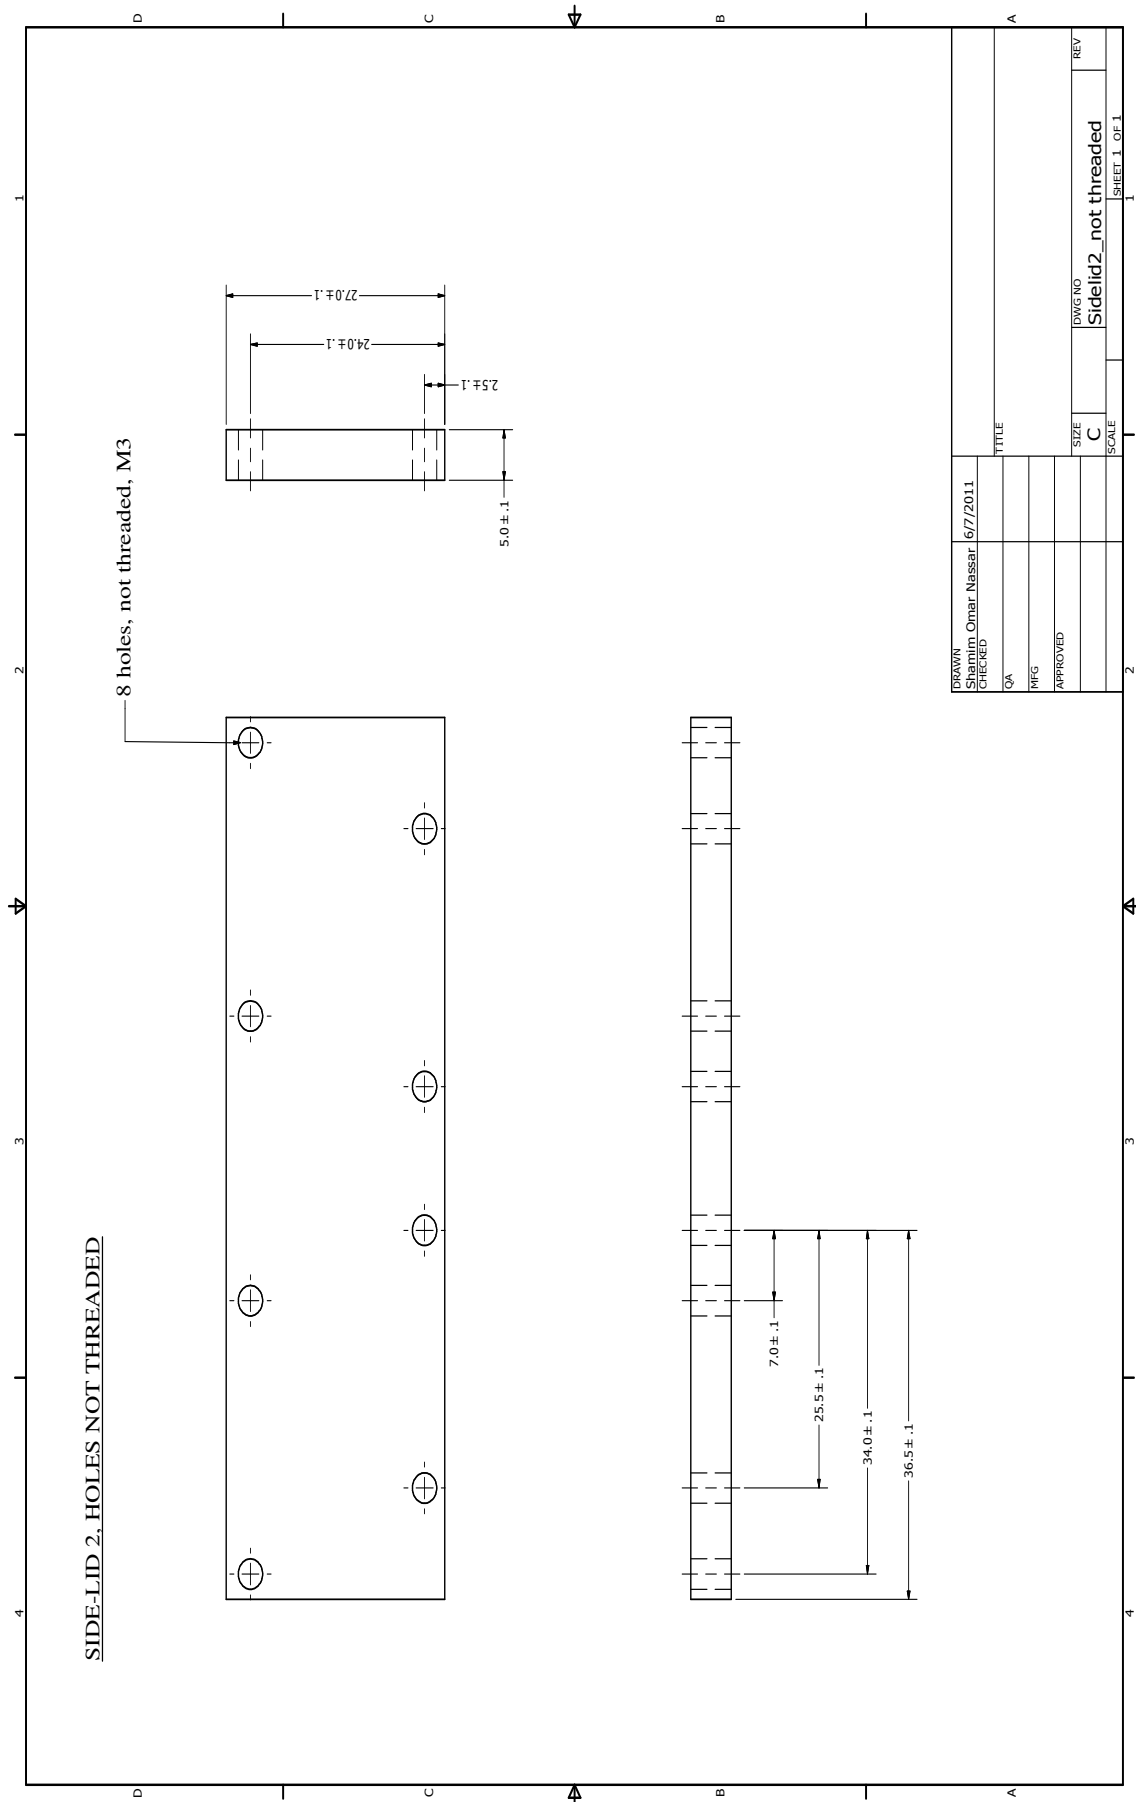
2.125GHz Combine Filter Sidelid Dimensions with Unthreaded Holes
